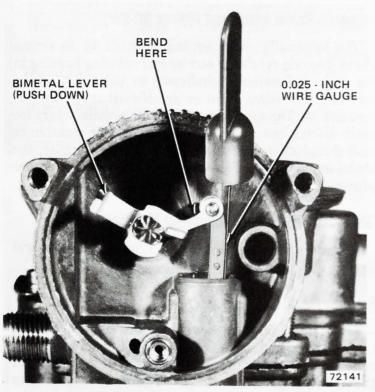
J-54 Initial Choke Valve Clearance Adjustment
